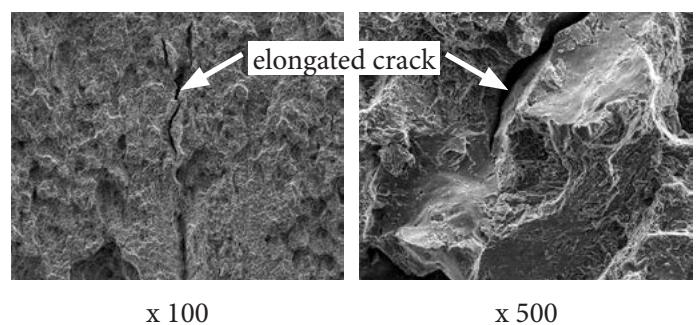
Elongated cracks revealed on the surface of radial crack fractures
